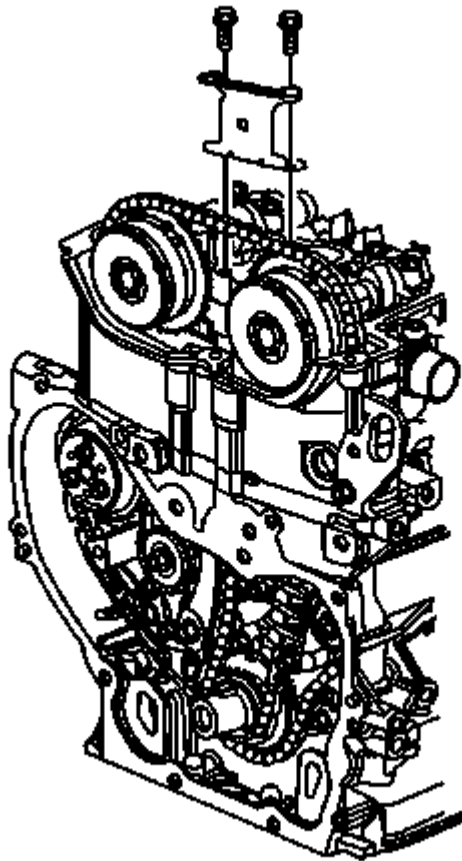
View Of Upper Timing Chain Guide & Bolts
